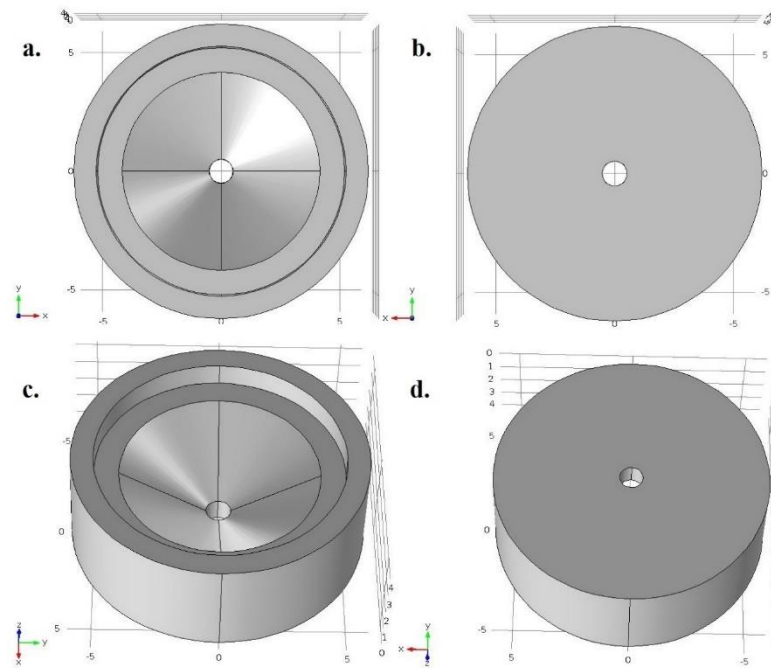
Schematic illustrations of top and bottom view of lower part of prototype 8, (a. top view, b. bottom view, c. inclined top view, d. inclined bottom view)
